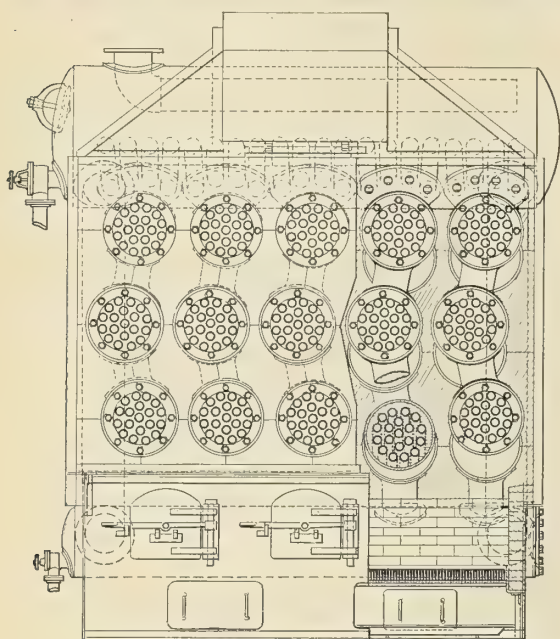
SECTIONAL ELEVATIONS OF COWLEY &amp; COOPER FIRE TUBE BOILER.
